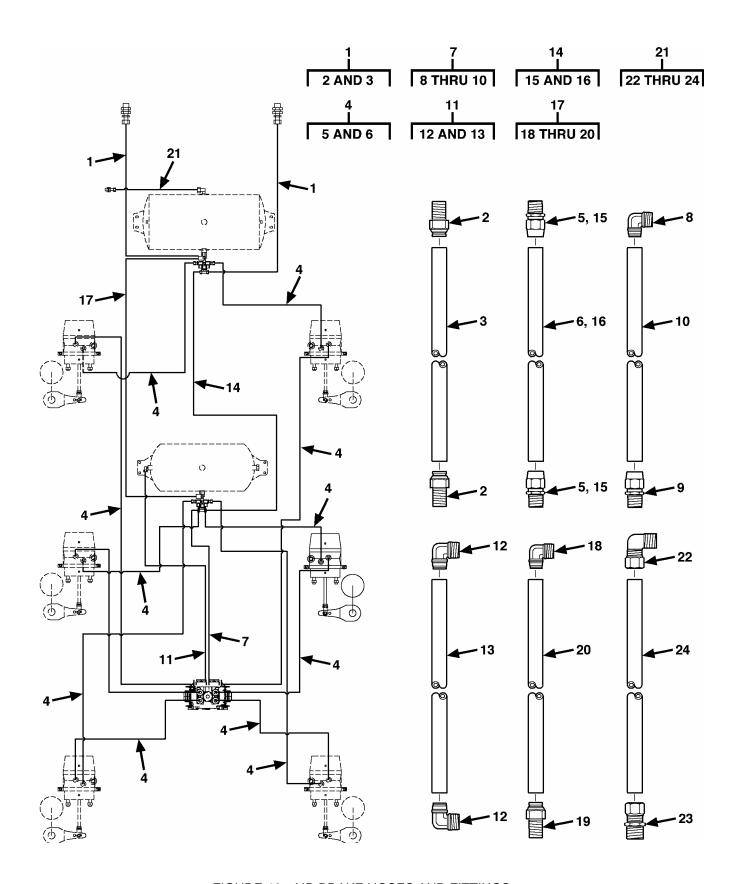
AIR BRAKE HOSES AND FITTINGS
